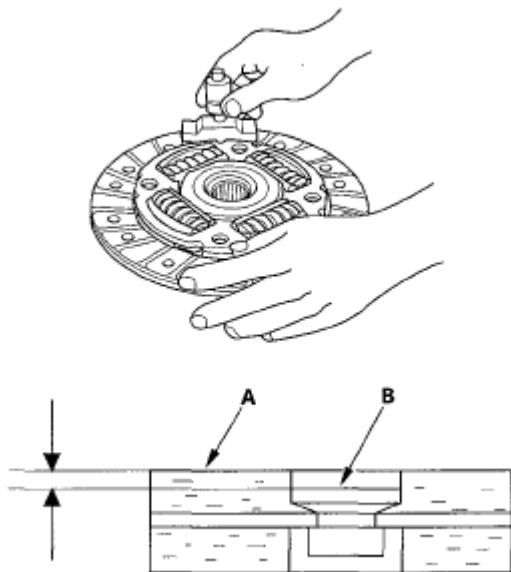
Measuring Rivet Depth Clutch Disc Lining Surface To Rivets
